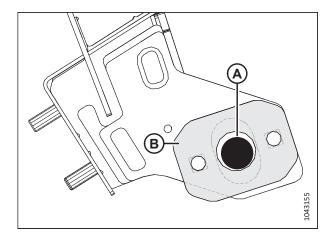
Ideal Feeder House Locking Pin Alignment – Single-Position Adjustment Plate
